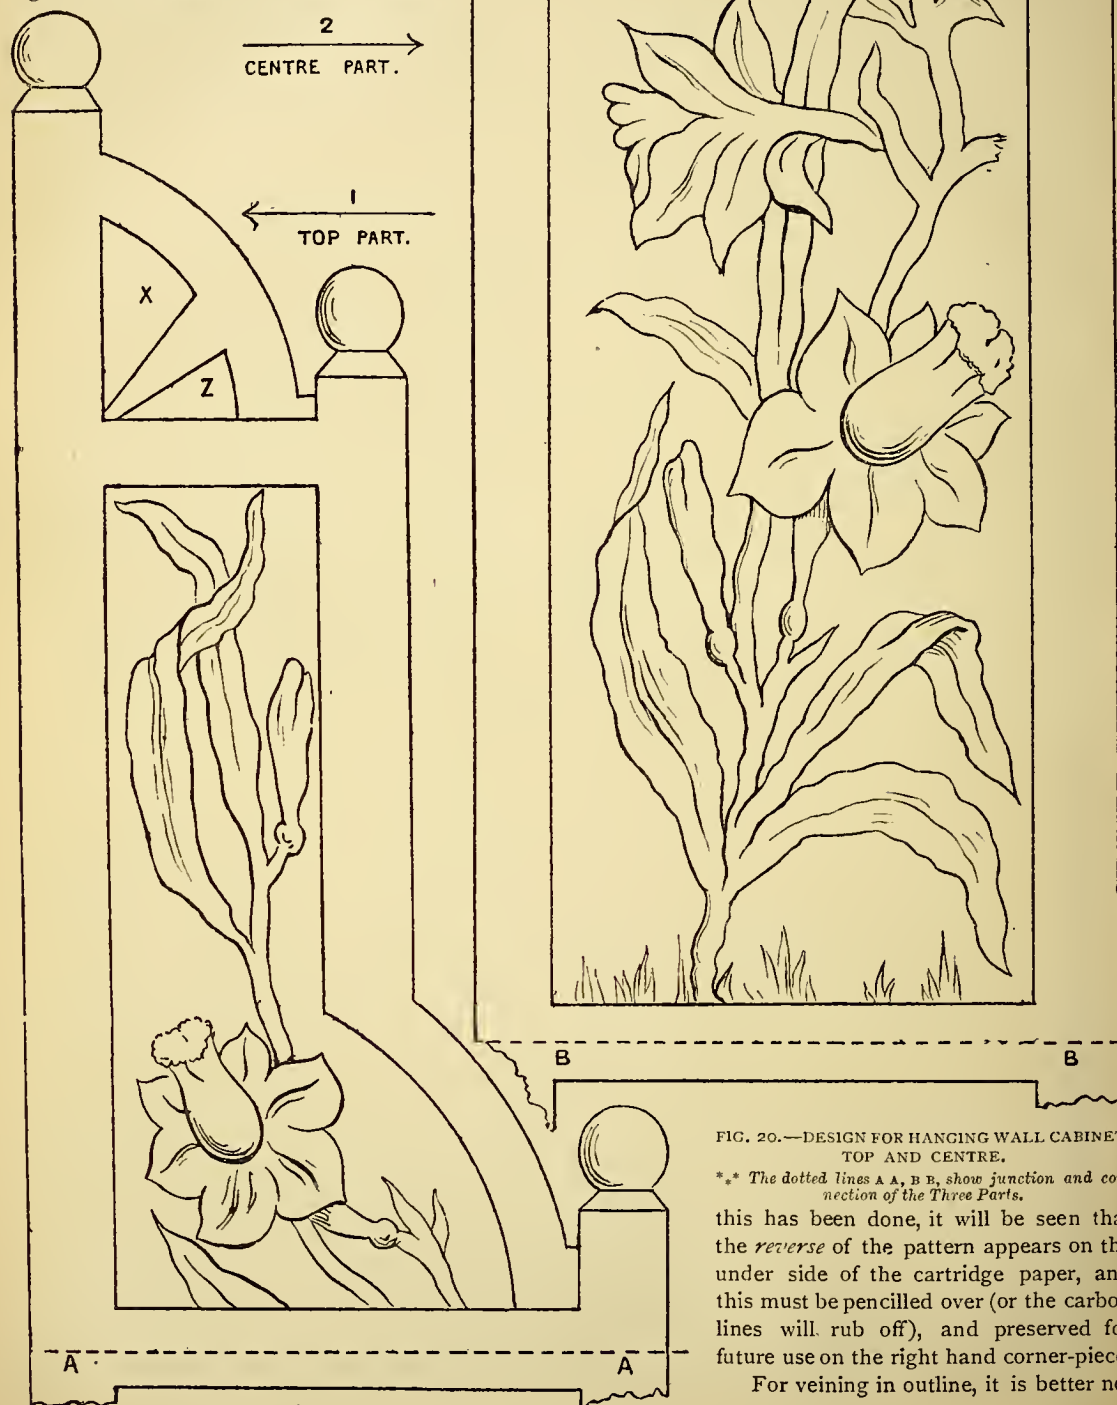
DESIGN FOR HANGING WALL CABINET, TOP AND CENTRE.
